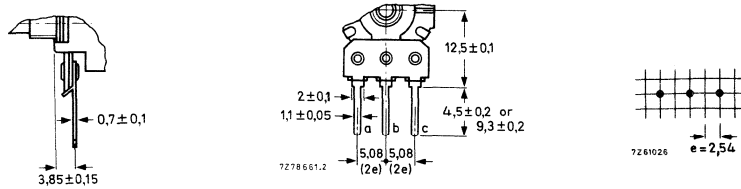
Long or short printed-wiring pins (single potentiometer).
